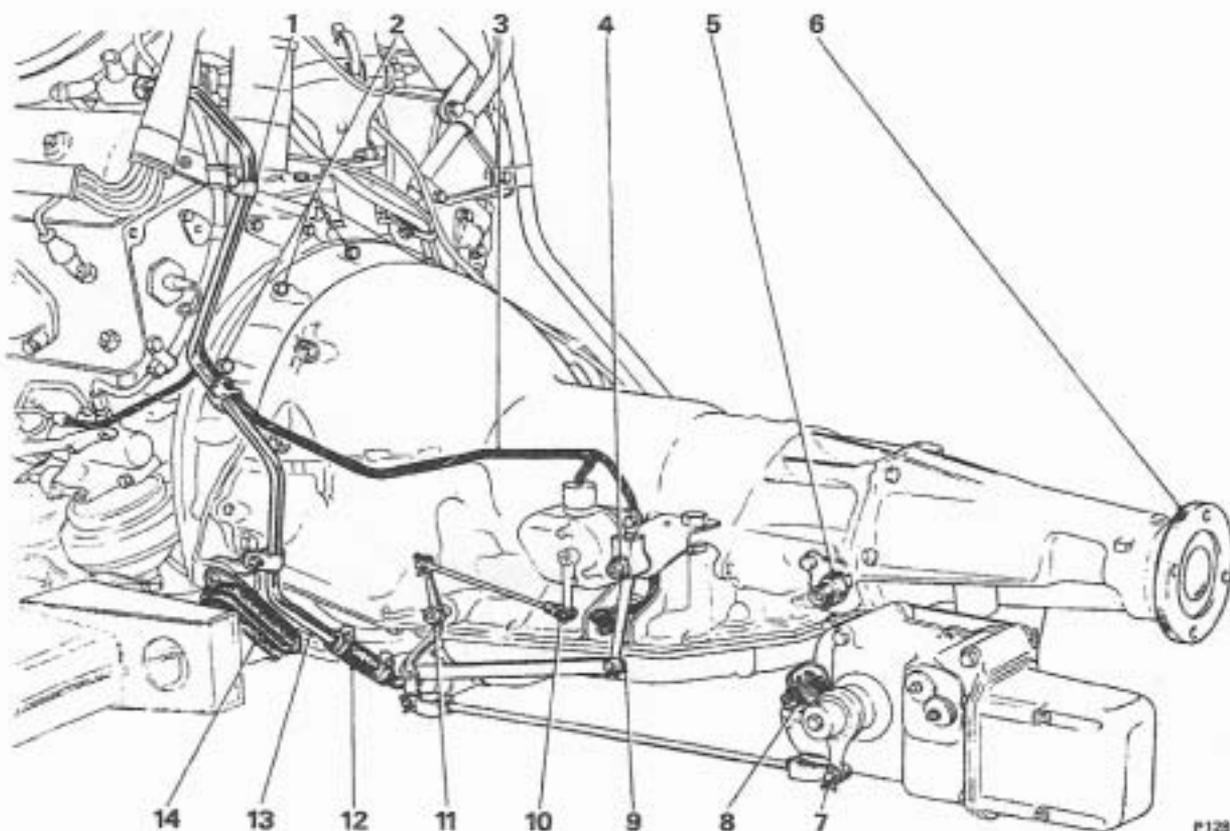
TRANSMISSION DISCONNECTING POINTS—NEAR-SIDE (EARLY CARS)
